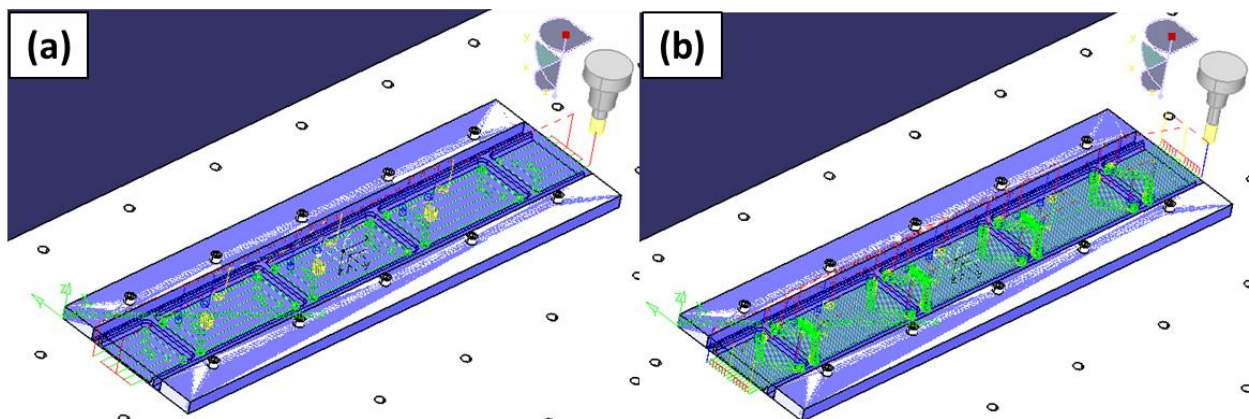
Stage 2 pocket milling; (a) roughing and (b) finishing
